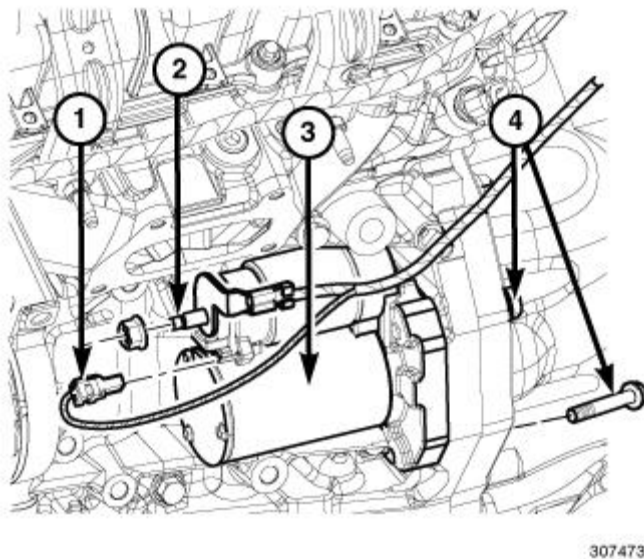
Starter Solenoid Electrical Connector, Solenoid Stud, Starter Mounting Bolts & Starter Assembly
